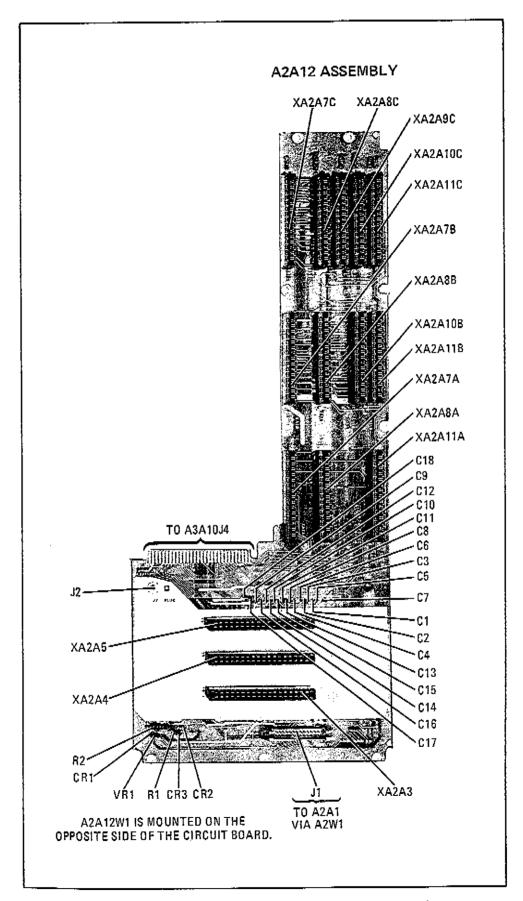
A2A12 Motherboard Assembly Component Locations
